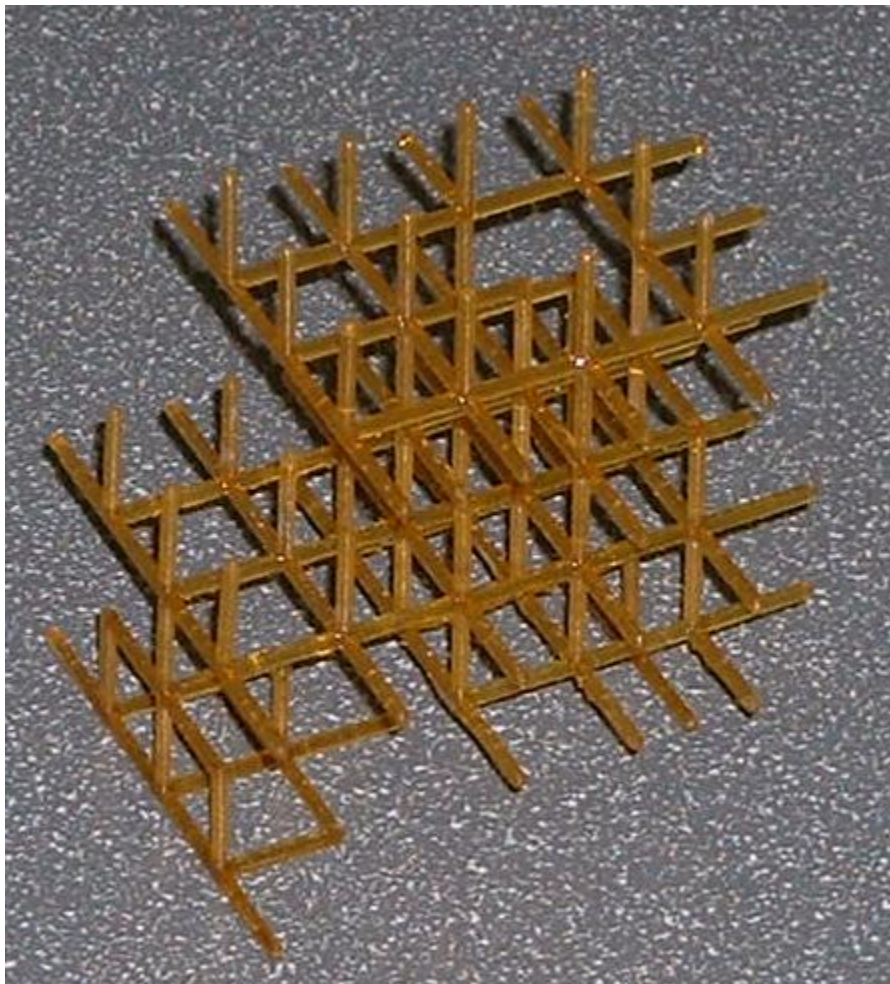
First Three Dimensional Design Made From SL 7510 Resin
